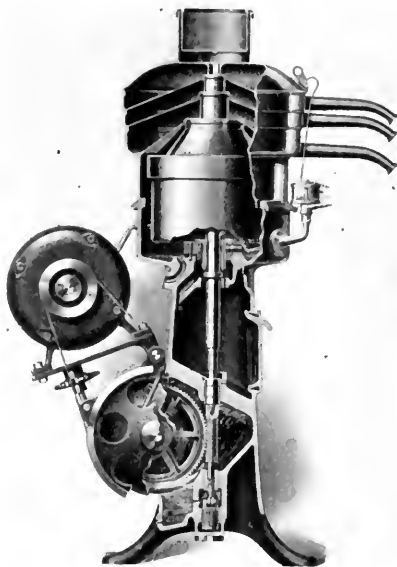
Cross-sectional View of a Disc-type Motor-driven Centrifugal Oil Purifier
